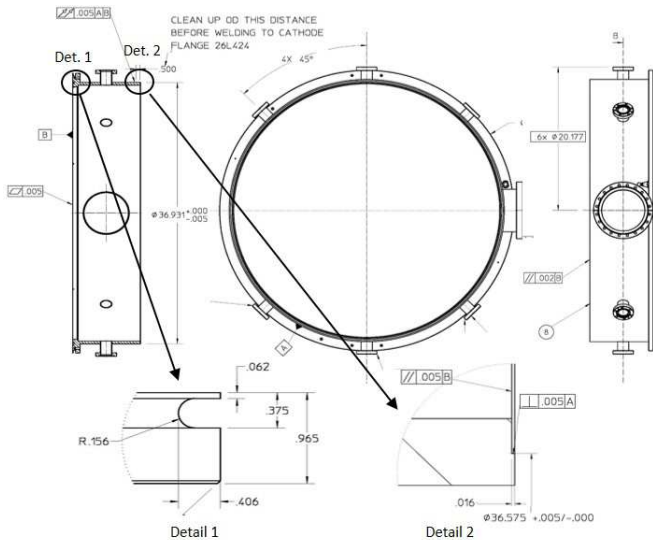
Excerpts from vacuum wall fabrication drawings.
